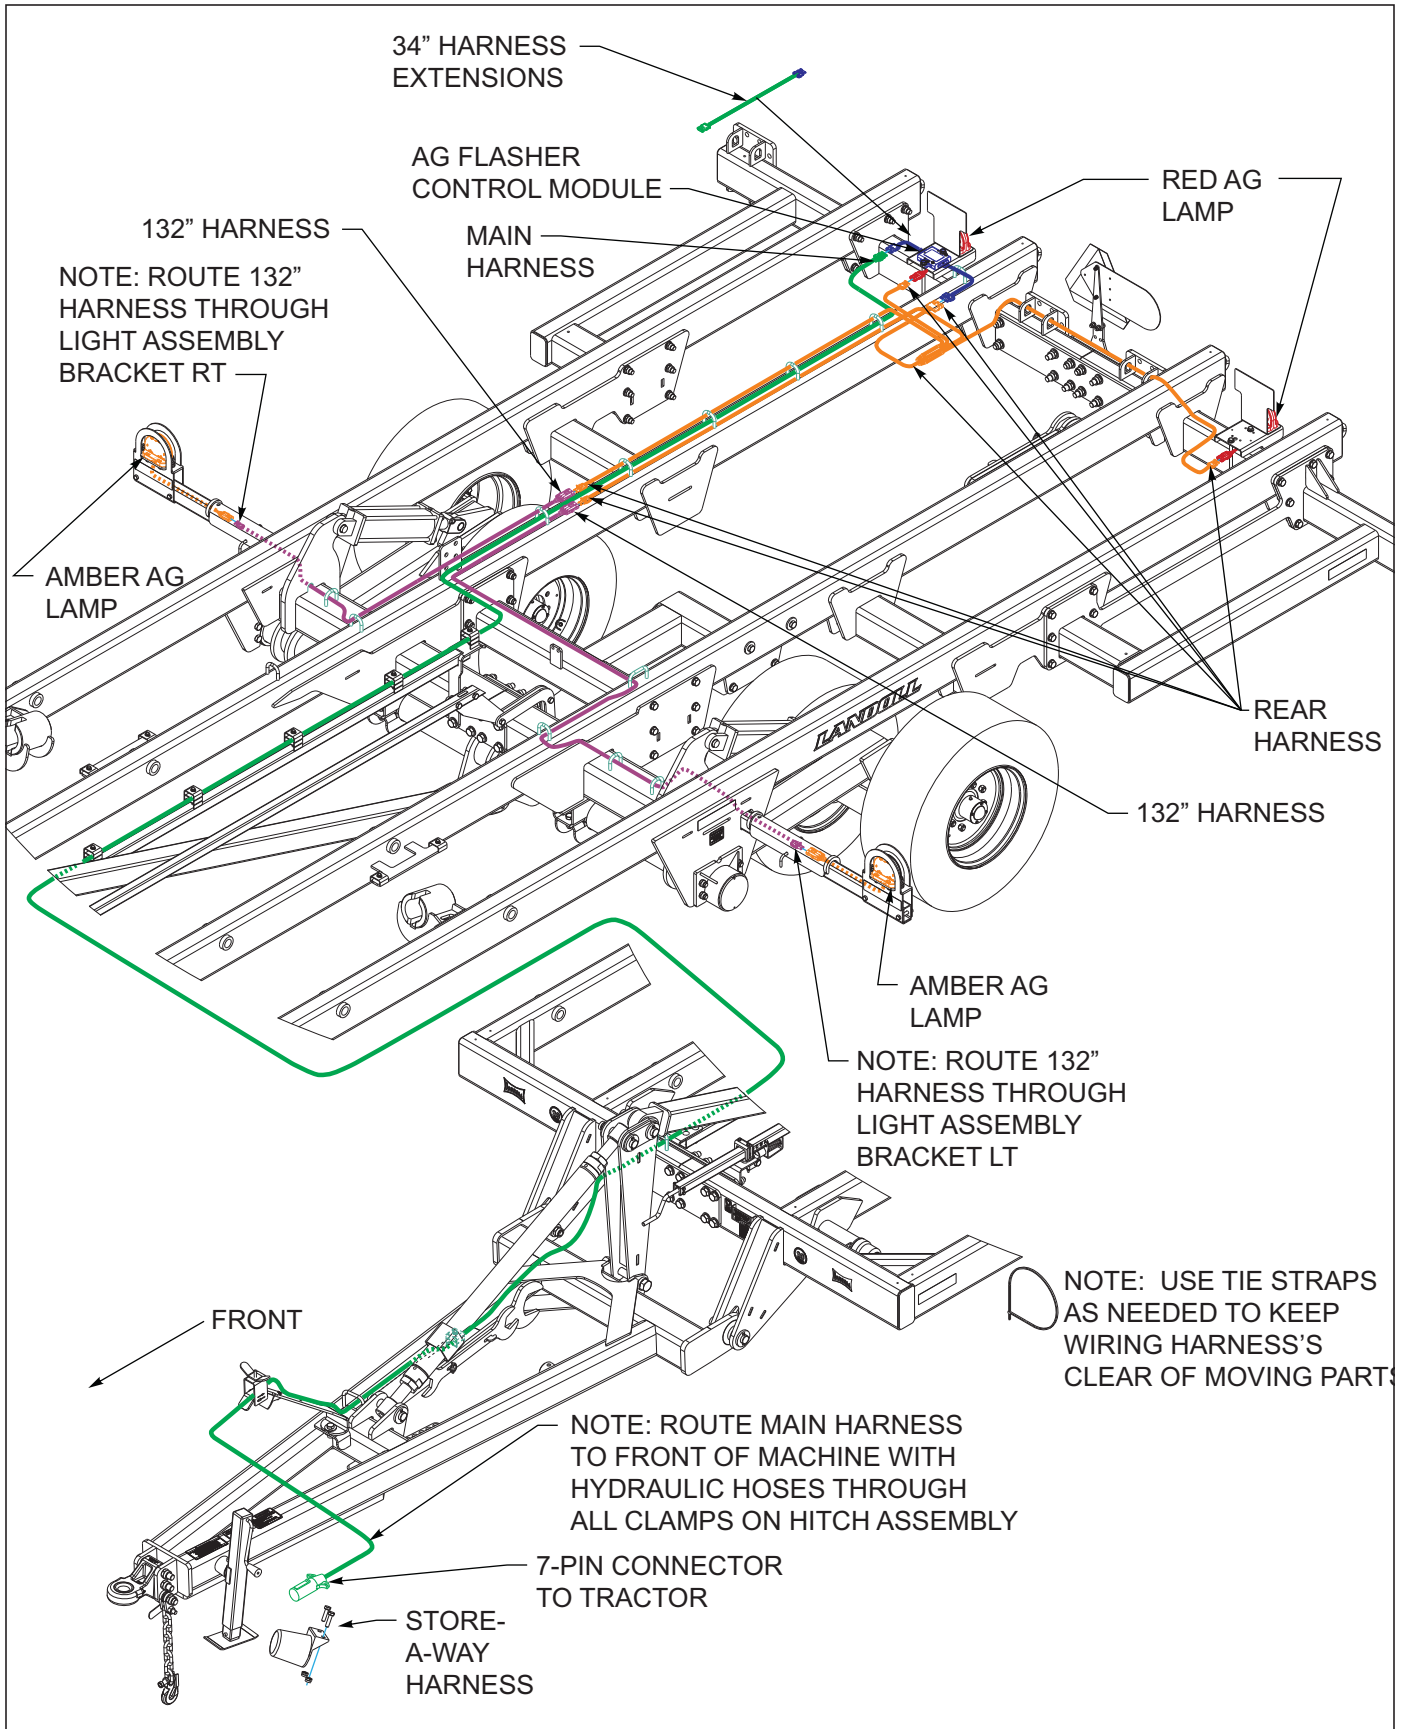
Electrical Assembly W/LED Lights 2411-06
